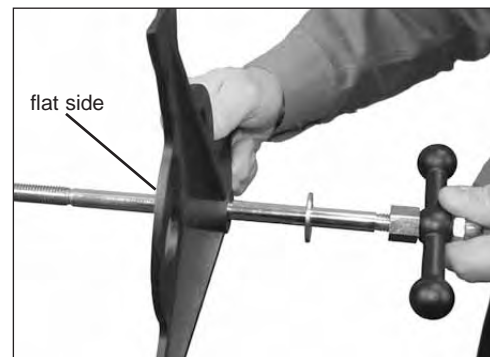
Fig. D: Slide spreader over threaded rod. Note the washer on the rod.
